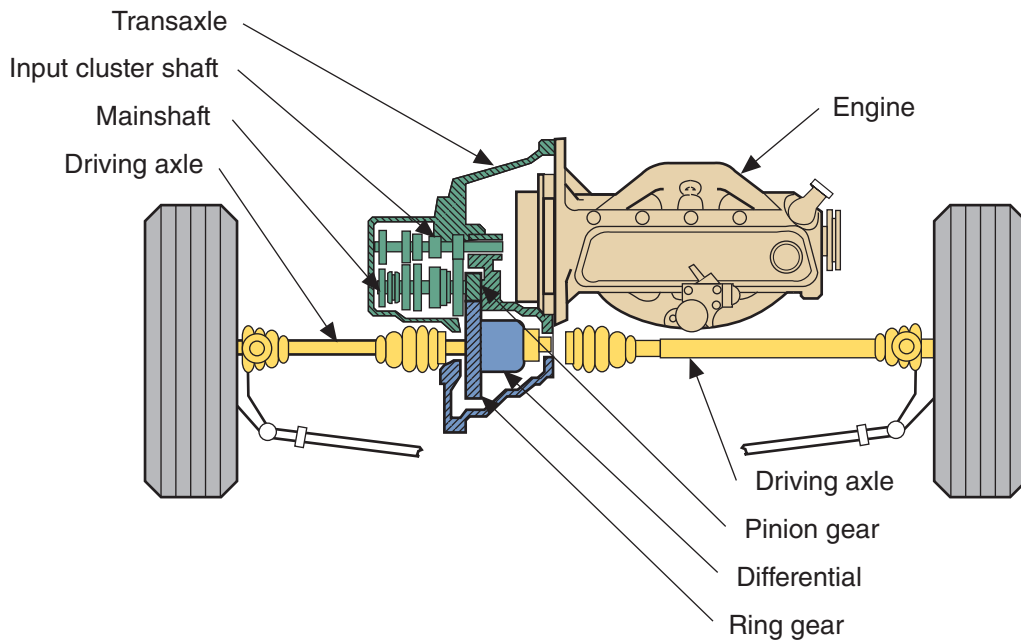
The location of typical front-wheel-drive powertrain components.
